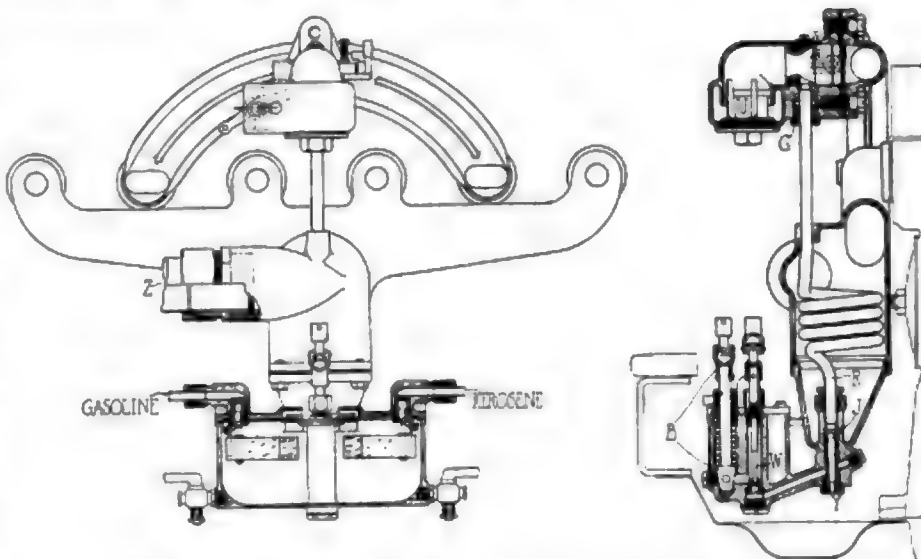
Sectional views of Holley kerosene vaporizer for use on Ford cars
